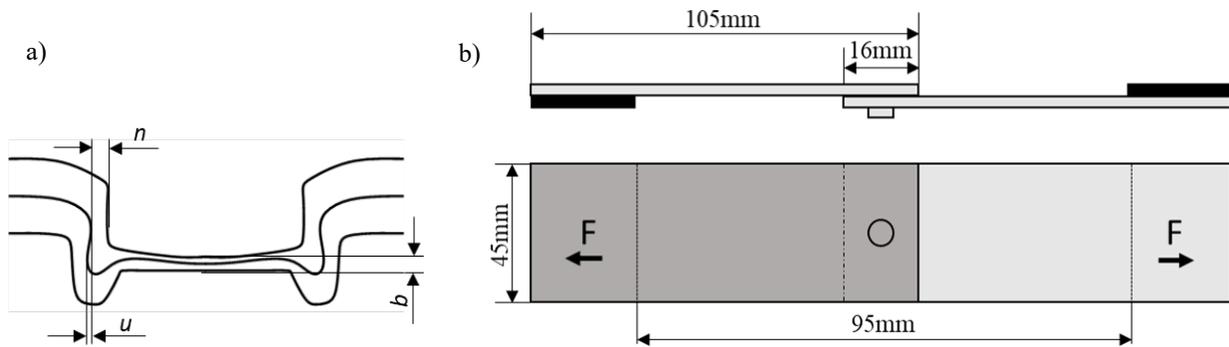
(a) Schematic cross-section of a clinch joint with the geometrical features neck thickness n , undercut u and bottom thickness b , (b) geometry of single-lap shear specimens with alignment plates (black) as used for the mechanical testing
